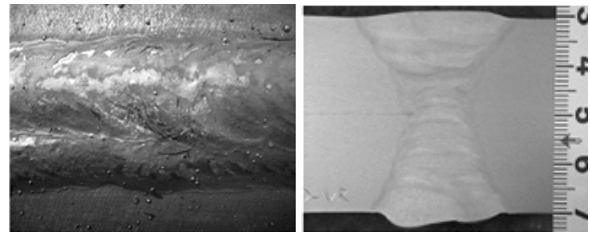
Flat position weld, (a) bead appearance and (b) macrostructure
